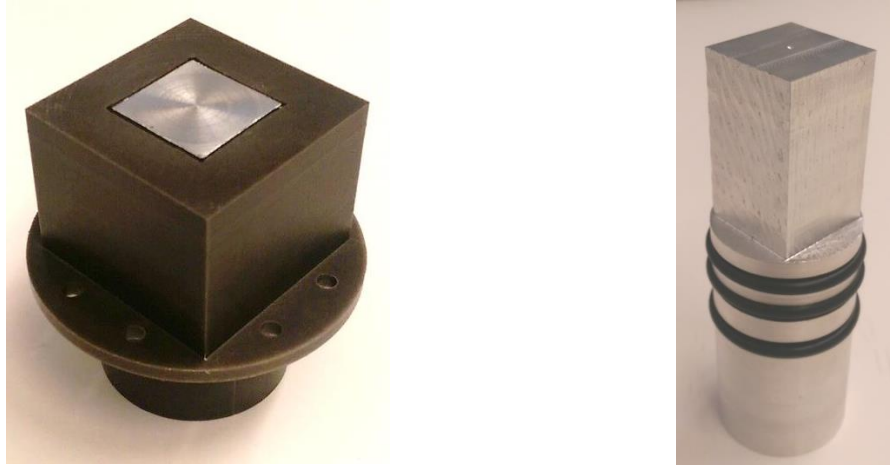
Images of current aluminum core measurement head. Left: Current longer, aluminum measurement head with new type of Delrin filled PTFE insulation. Right: Measurement head core before insertion. Three o-rings are used to provide a good vacuum seal.
